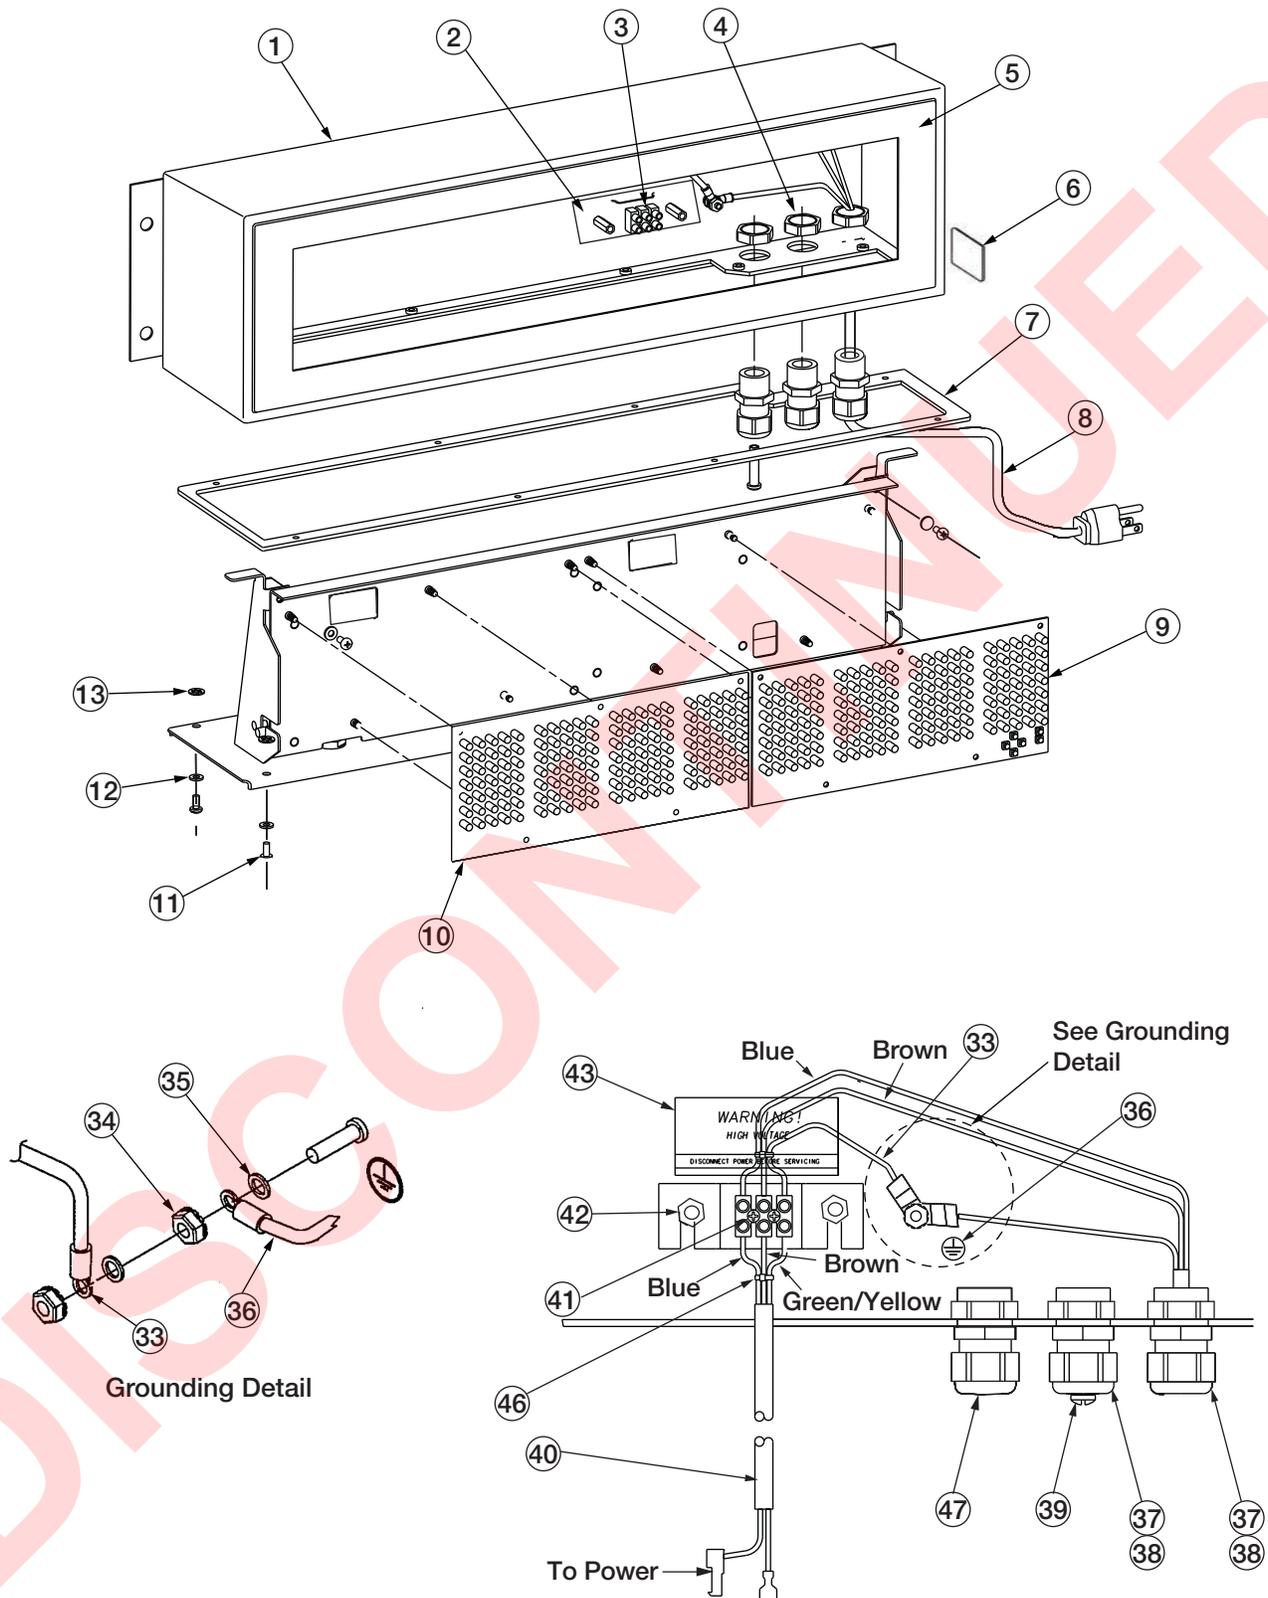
8 and 12 Character LaserLight Assembly Parts Illustration
